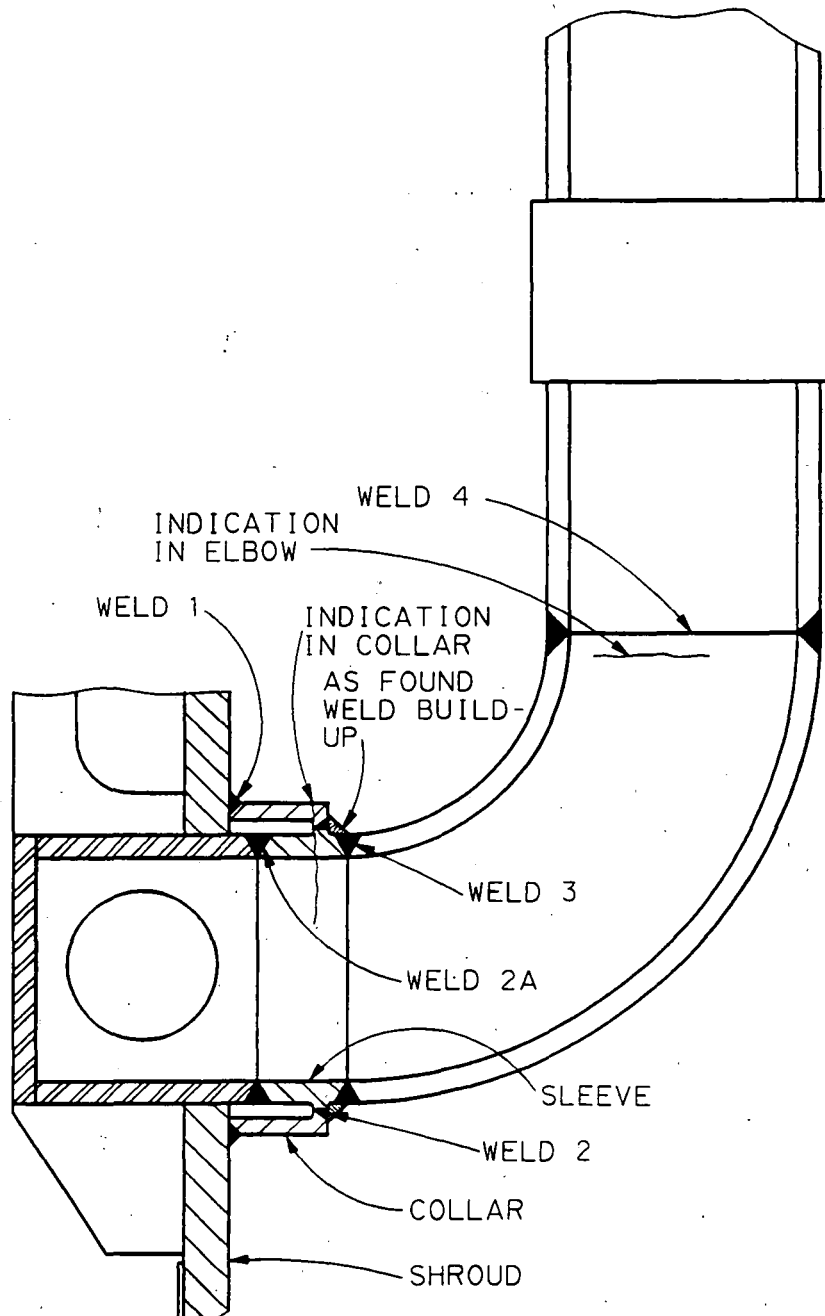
Core Spray B-Loop 260° Lower Sparger Inlet Thermal Sleeve & Elbow
